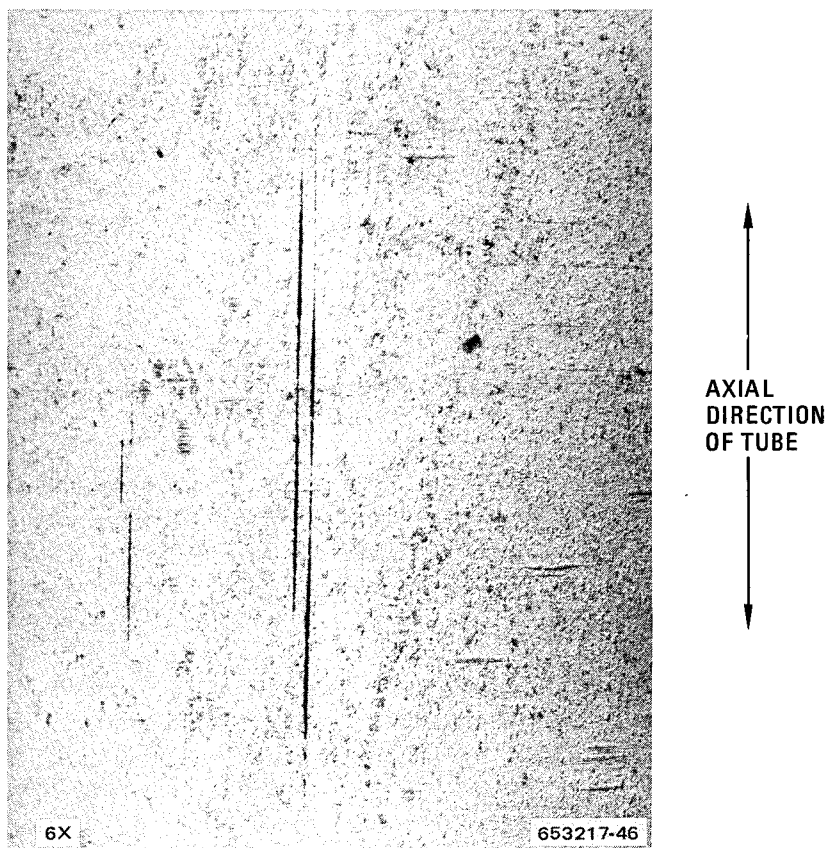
B/Al Tube Specimen, EU06-12, Showing Longitudinal Surface Cracks
